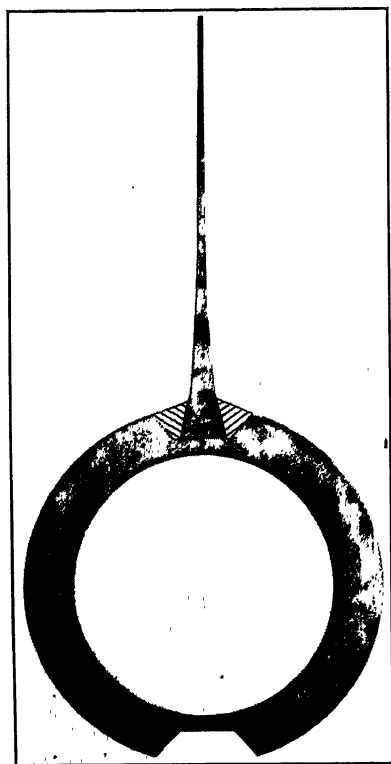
CROSS-SECTION THROUGH BLADE.
